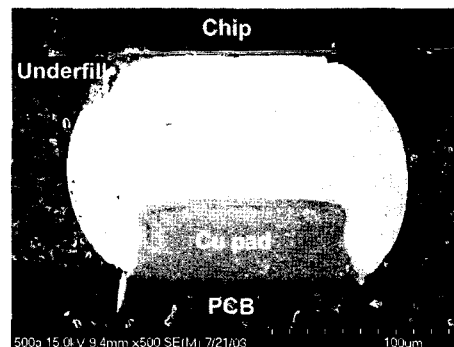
Cross section of Flip Chip solder bump after 500 cycles
